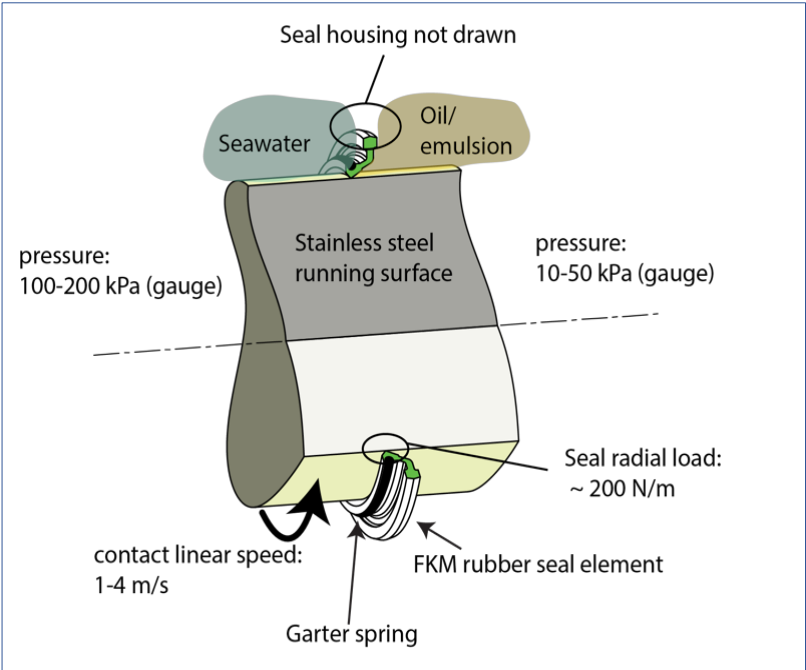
3D-picture of an FKM-rubber rotary seal element running on a stainless steel propeller shaft⁴.
